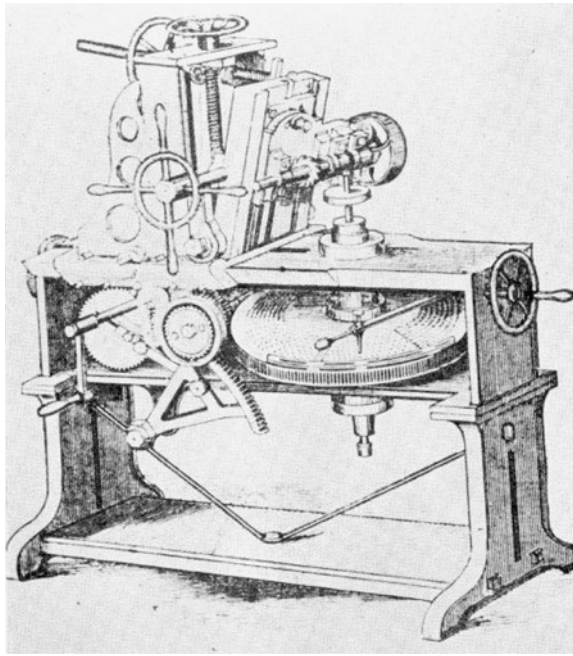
First Brown & Sharpe gear cutting machine, 1855 AD.
